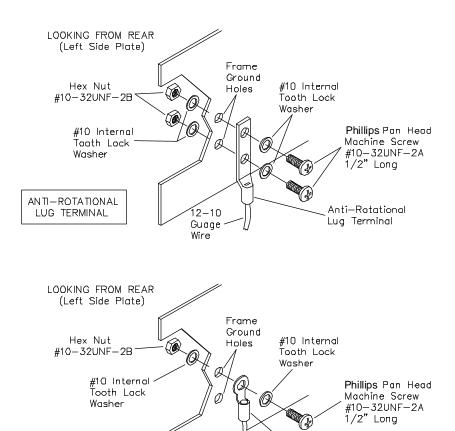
USS-1-AC and USS-2-DC Shelf Frame Ground Connection
